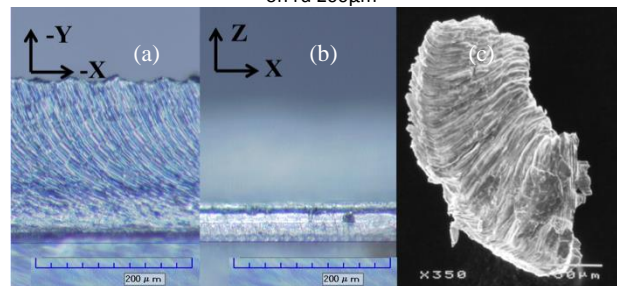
bottom (a) and side (b) view of machined surface and chip (c) on  $rd$  400 $\mu\text{m}$
